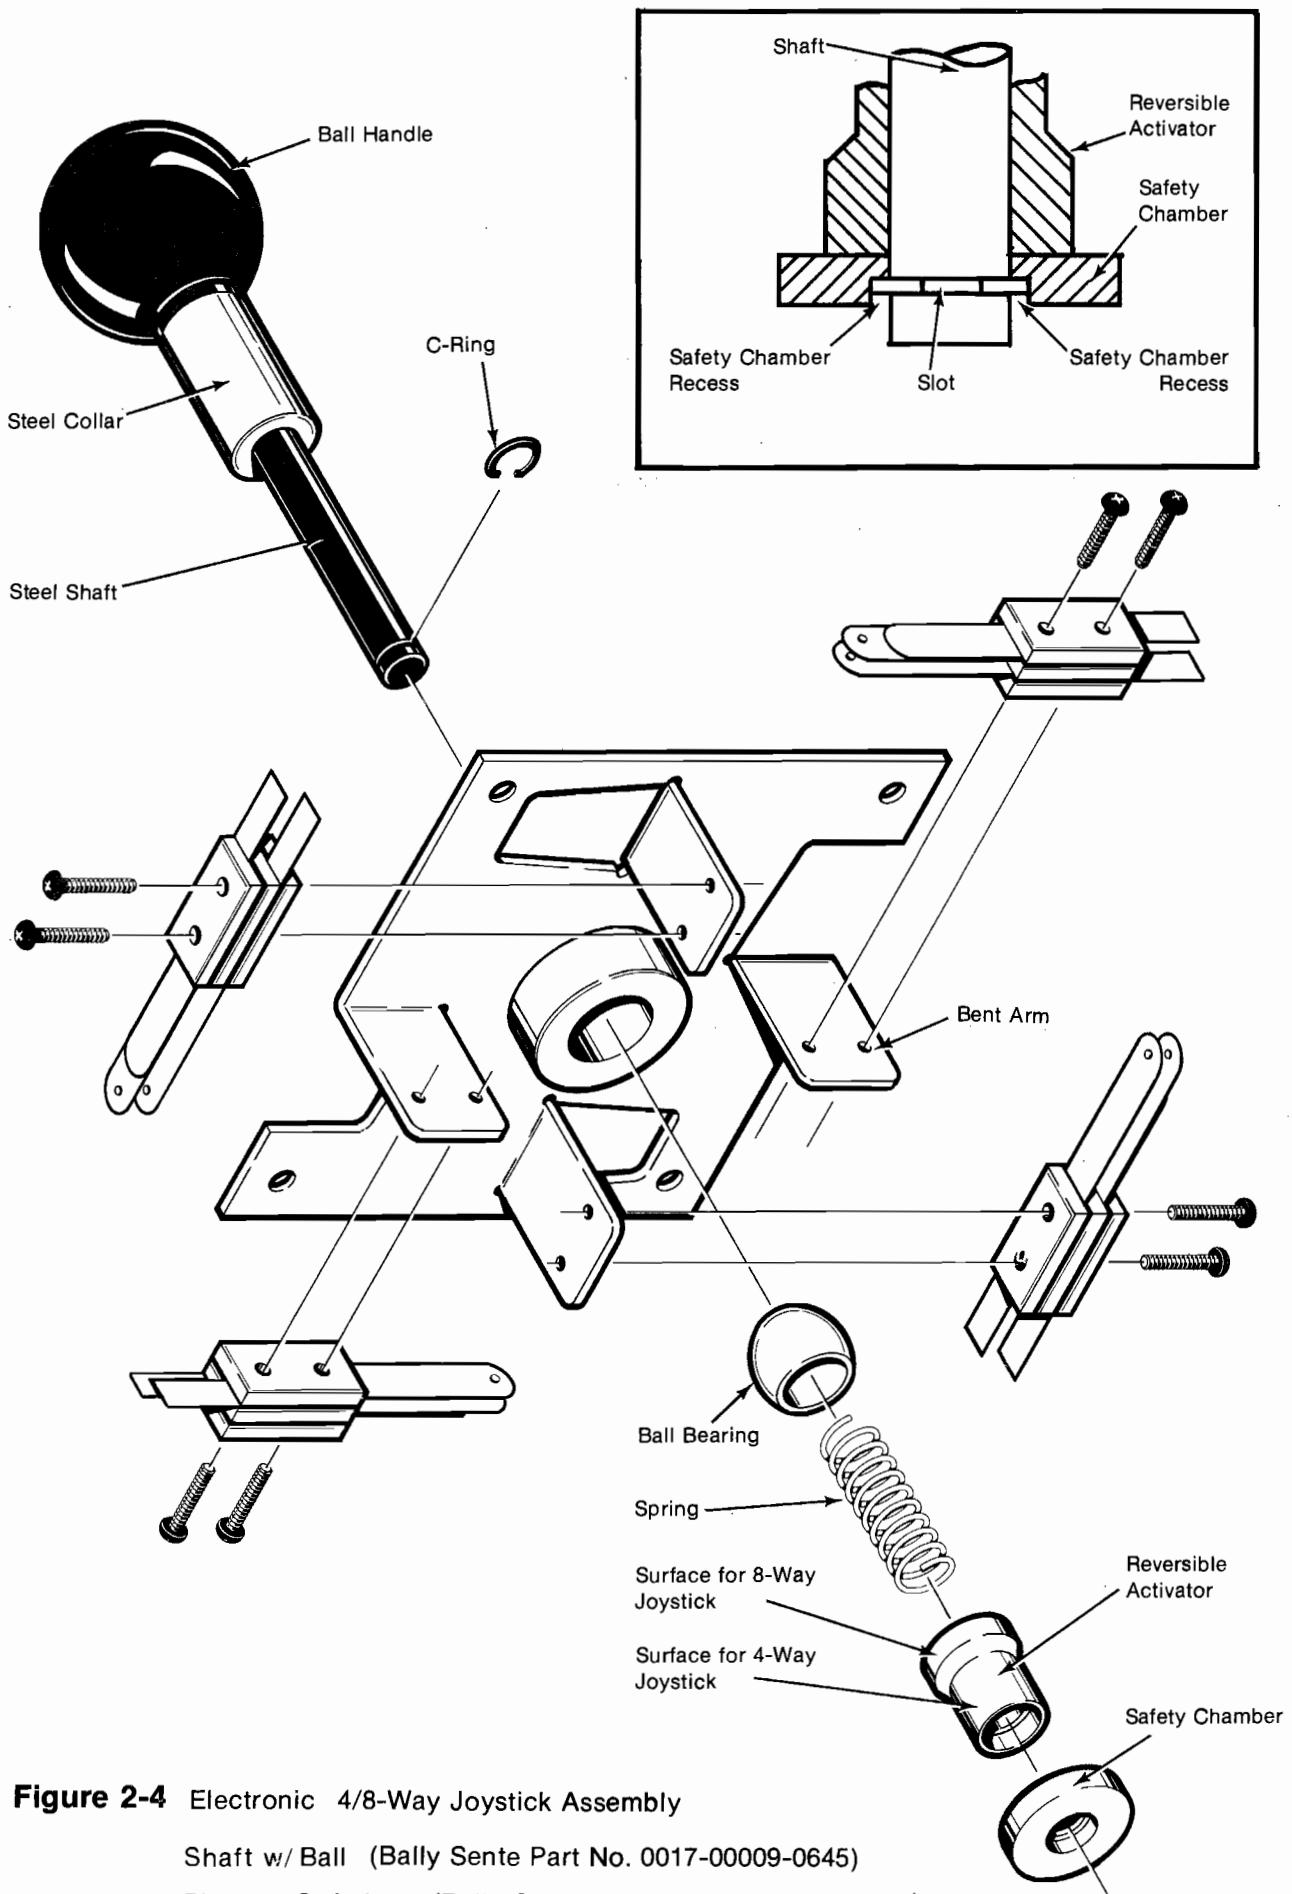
Electronic 4/8-Way Joystick Assembly
